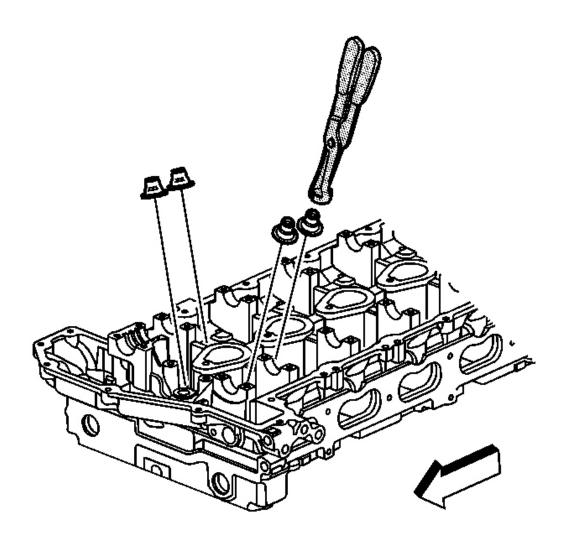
View Of Valve Stem Seals Courtesy of GENERAL MOTORS CORP.
